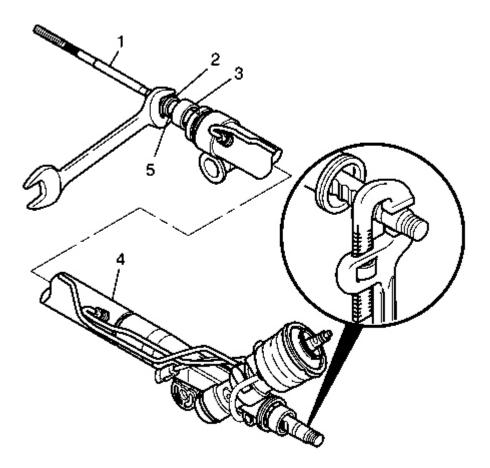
View of Shock Dampener, Inner Tie Rod Housing, Rack & Inner Tie Rod Courtesy of GENERAL MOTORS CORP.
